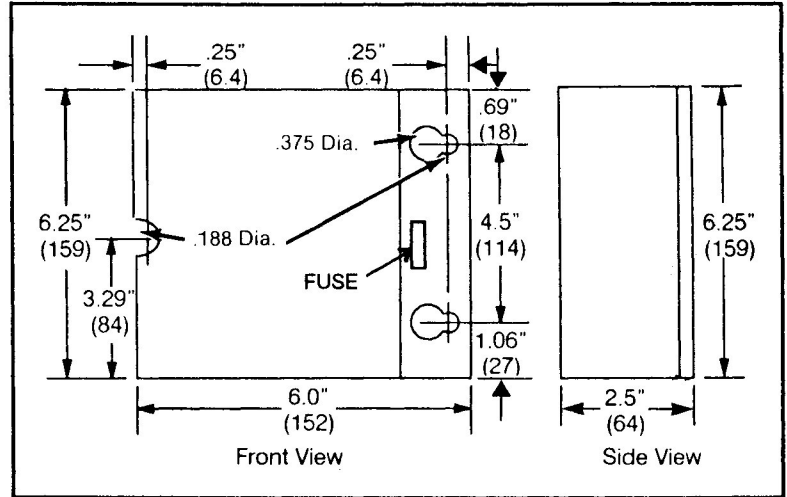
HS1 Heatsink Dimensions (for series 50 Plate Design)
